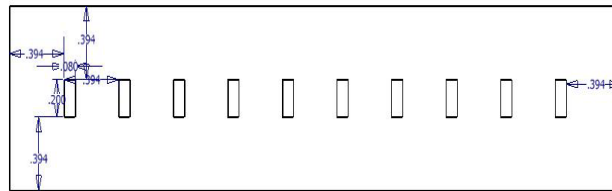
The figure shows a CAD drawing of the assembly device used to space the cable guides at 1 cm increments along the rod.
